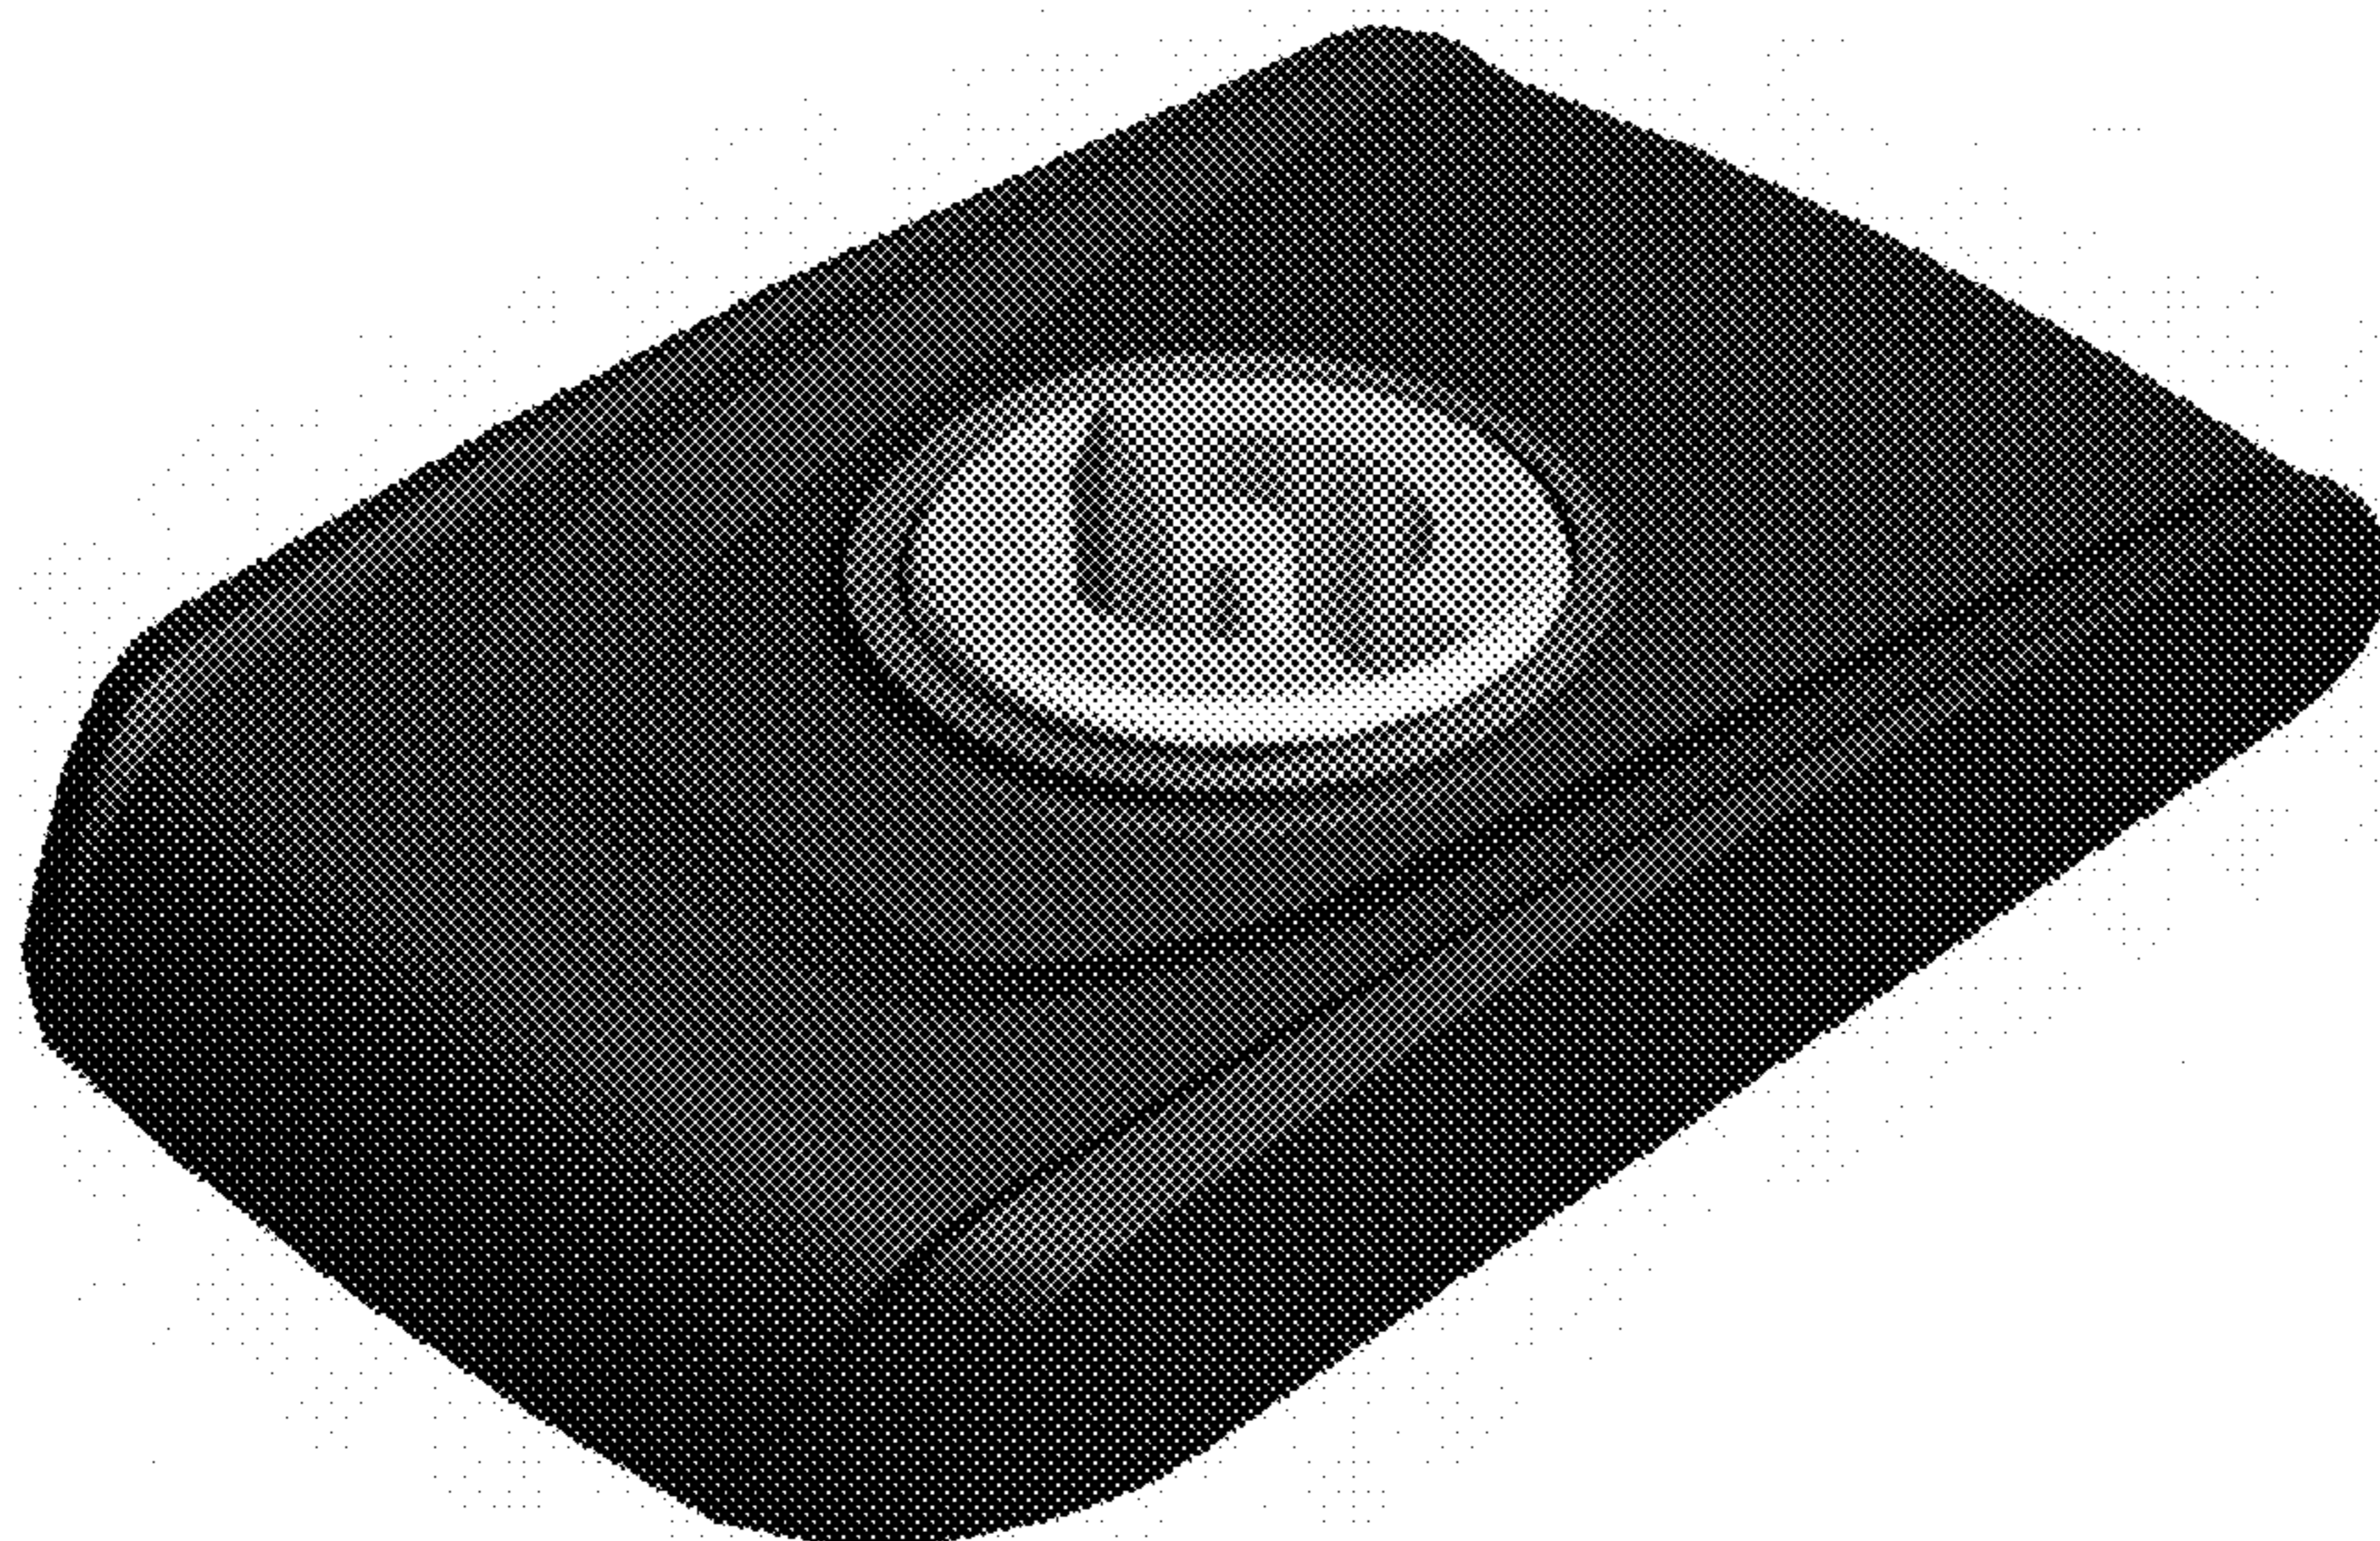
is a top view of the door handle for switchgear cabinet of the first embodiment.
